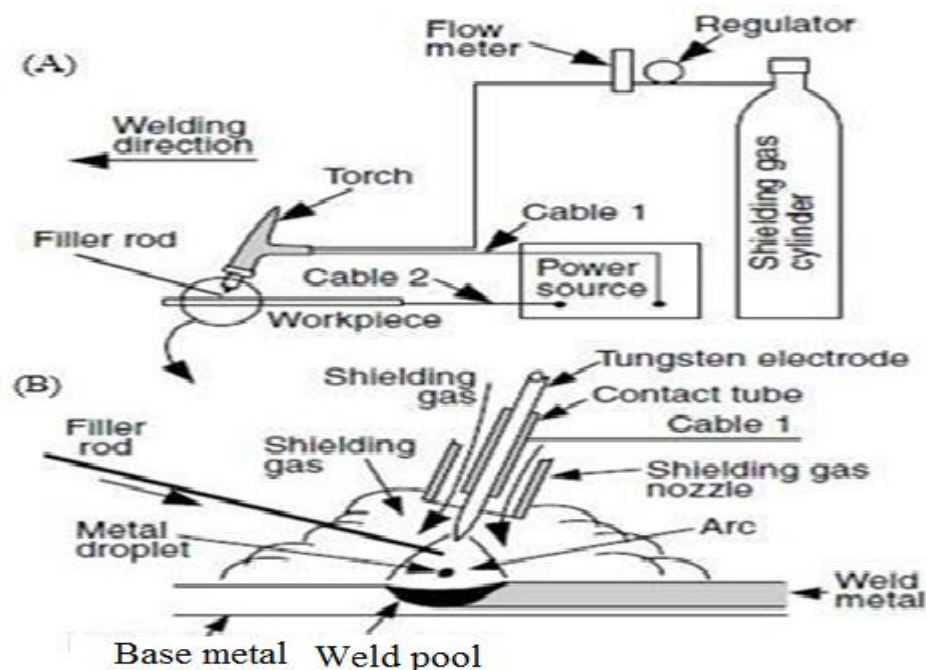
GTAW: (A) overall process, (B) welding area enlarged. [4]
